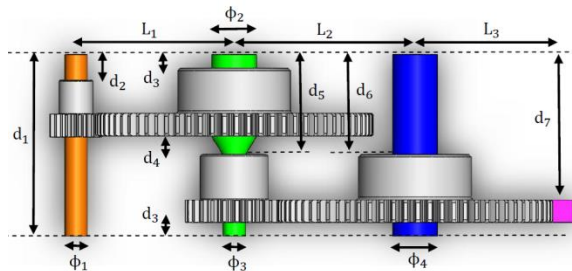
, Top view of the mechanism showing the parameters needed for the 3D assembly model.
